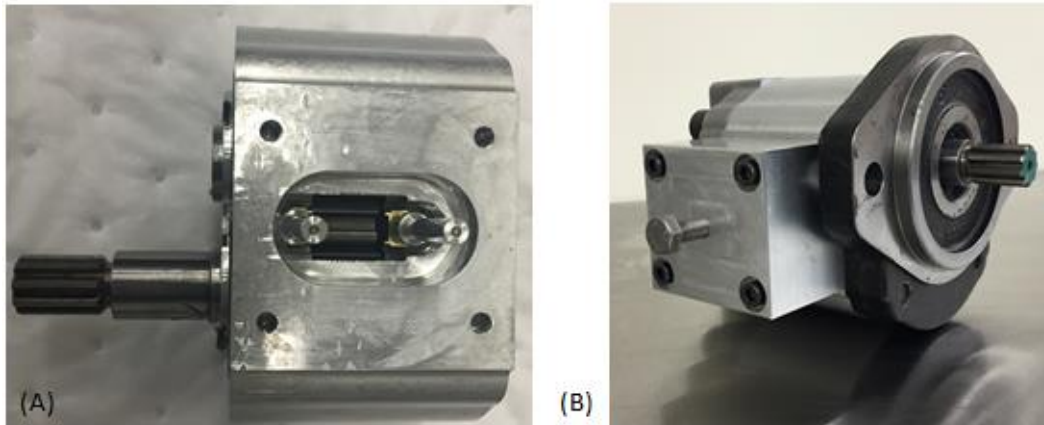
(A) VD-EGM with most of the internal components assembled; (B) Exterior view of the VD-EGM.
